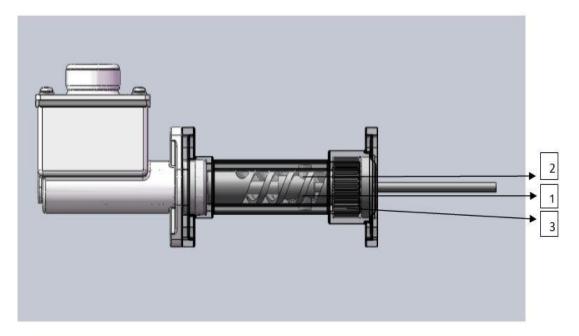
Linear brake actuation system. 1-Barrel 2-Head 3-Driven gear.
